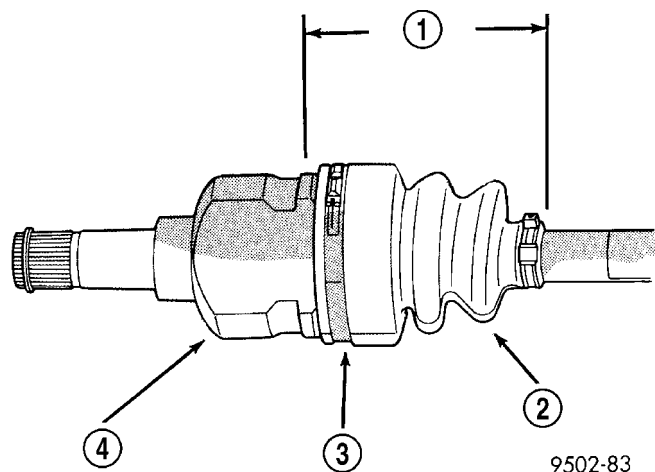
Sealing Boot End to End Length with Hytrel Boot
